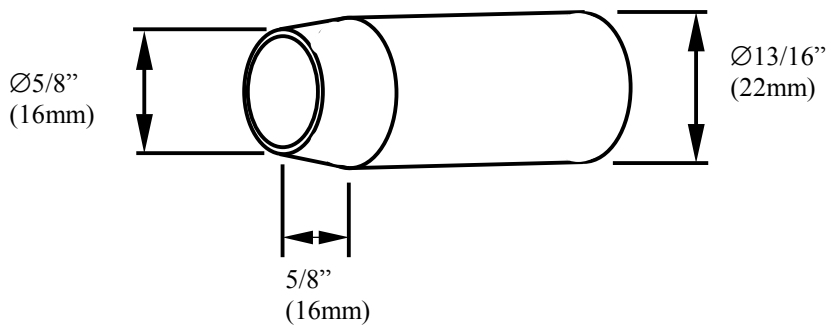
Chamfer dimensions for the Ø1/2" PVC pipe
